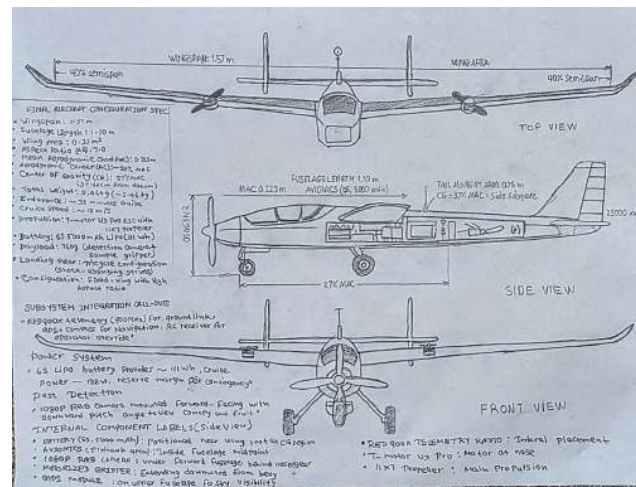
Three-view of final aircraft design showing dimensions: wingspan 1.57 m, fuselage length 1.10 m, wing area 0.35 m², center of gravity location 27% MAC, and internal subsystem placement including battery, flight controller, GPS, telemetry radio, pest detection camera, and sample-gathering gripper. Sample Gathering System
